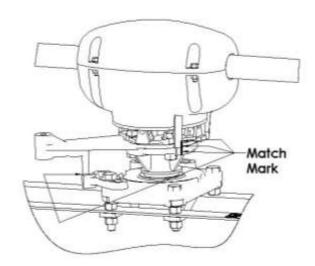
Hinge Assembly Match Mark (115 - 161 kV)
